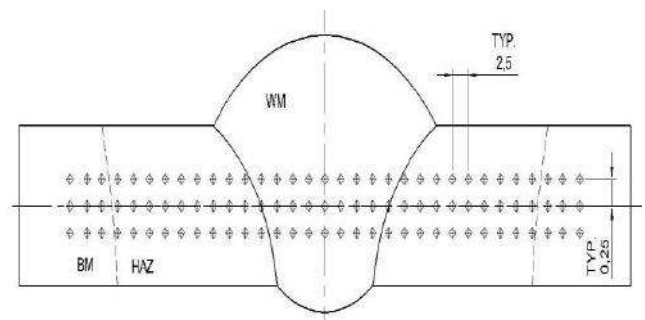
Arrangement of the sample's microhardness measurement points. Where HAZ is the Heat Affected Zone, BM is the Base Metal, and WM is the Welding Metal or Fusion Zone.
